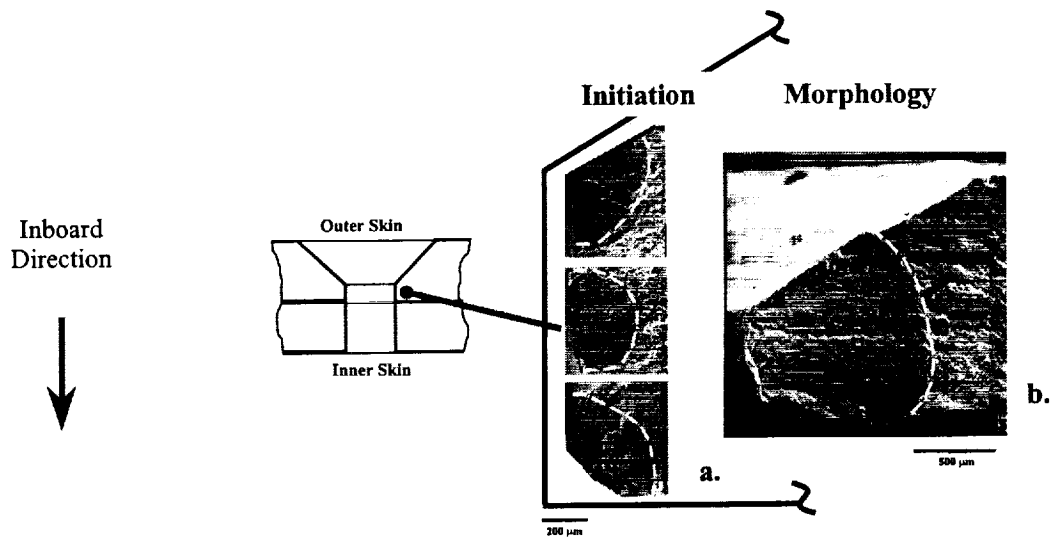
100° countersink rivet outer skin fatigue cracking: a) Depicted is the outline of the rivet hole and the micrographs show the typical crack initiation sites along the rivet hole surface and crack morphology (dashed lines mark the crack front) and b) shows the typical crack front shape of a fatigue crack that has propagated nearly one-half the length of the counter sink.
